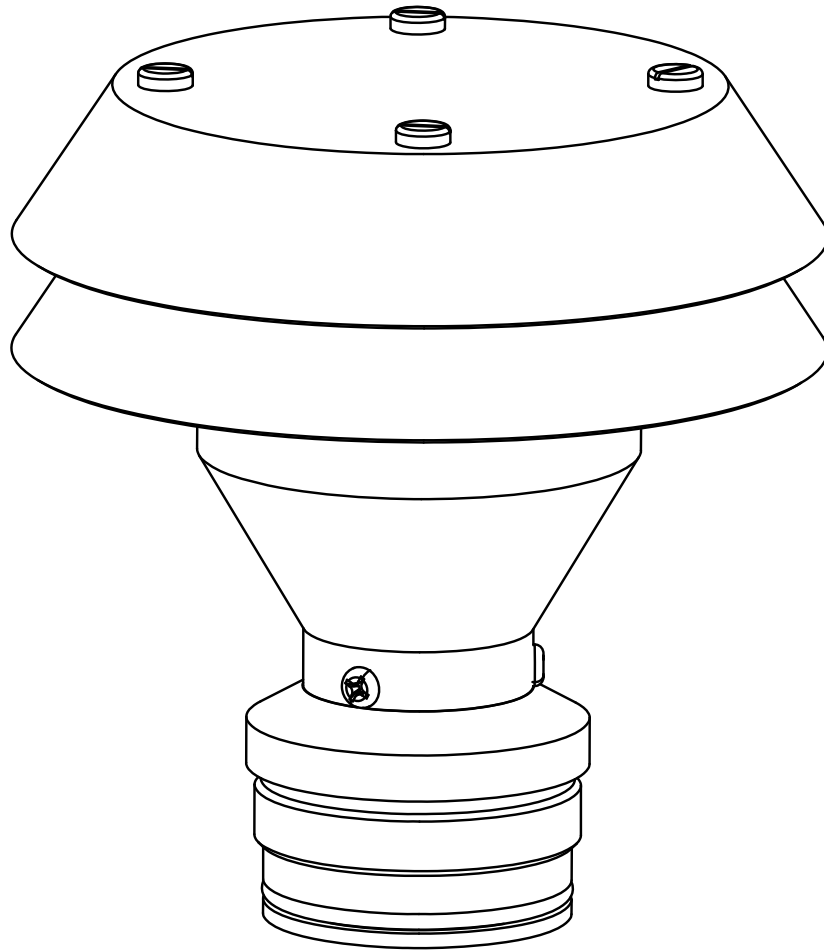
Drawing of Jet Removed for Cleaning or Size Change
